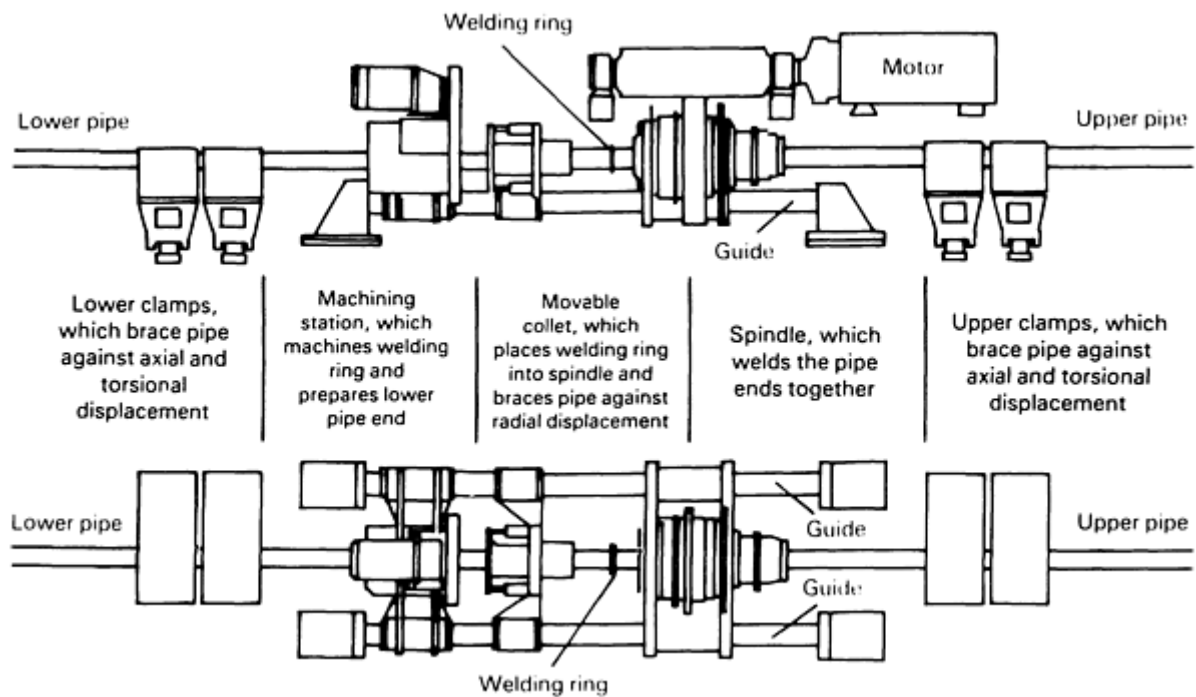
SCHEMATIC OF THE PROTOTYPE RADIAL FRICTION-WELDING MACHINE
